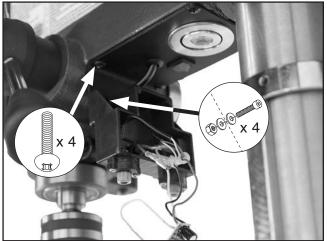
Location of laser module electrical box and LED assembly fasteners.
